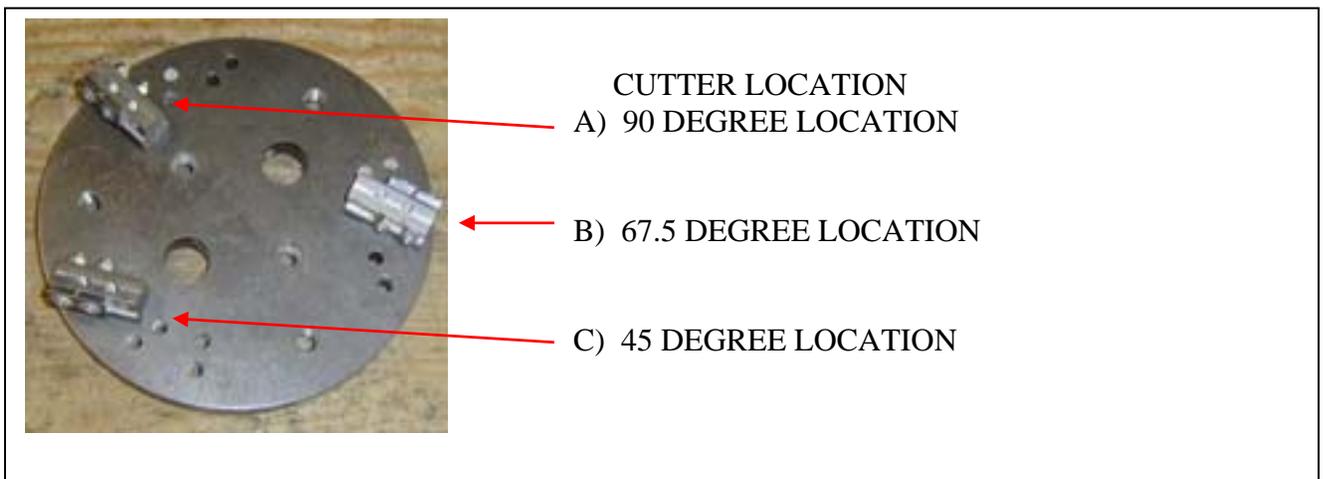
Photo of bottom of BMG-2500 illustrating proper rotation, proper Carbide Holder, Carbide Holder Block and Cutter placement.
